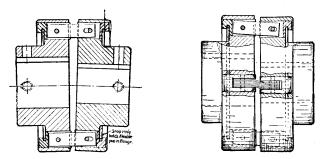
FLANGE FLEXIBLE COUPLING FIG. 27
